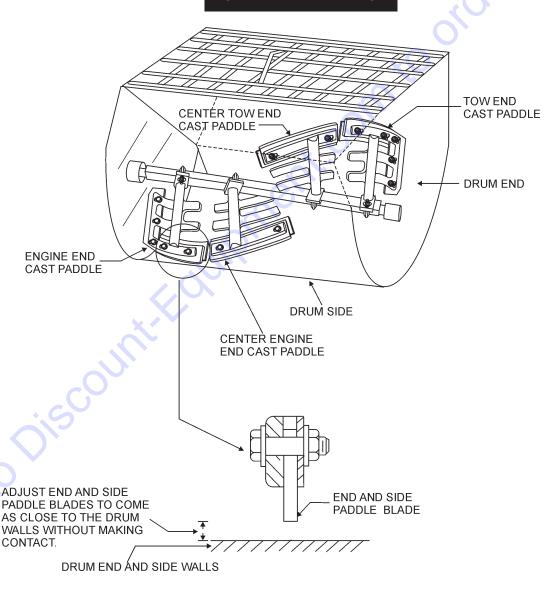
Paddle Blade Adjustment, Polyethylene Drum
